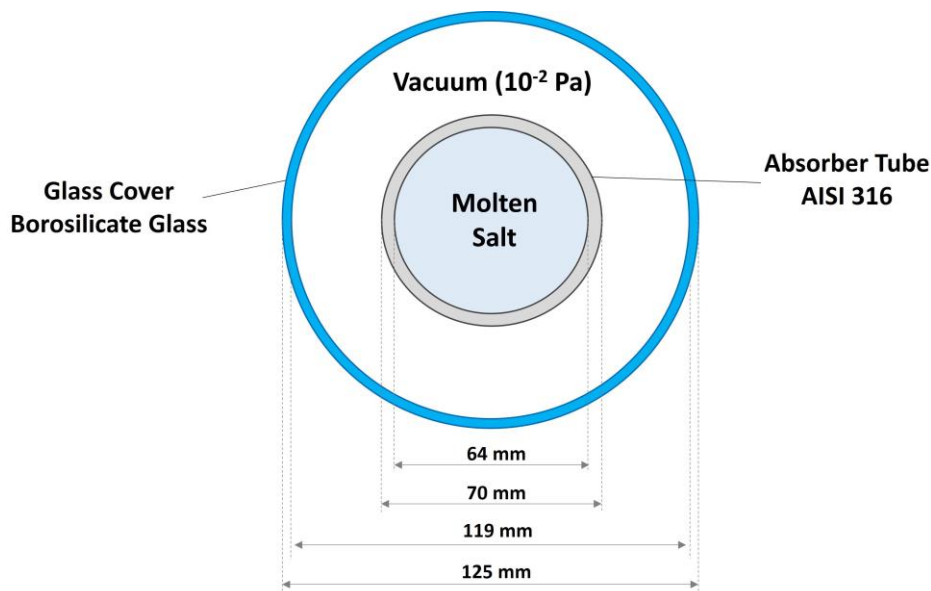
Cross-sectional view of the reference PTC receiver tube
